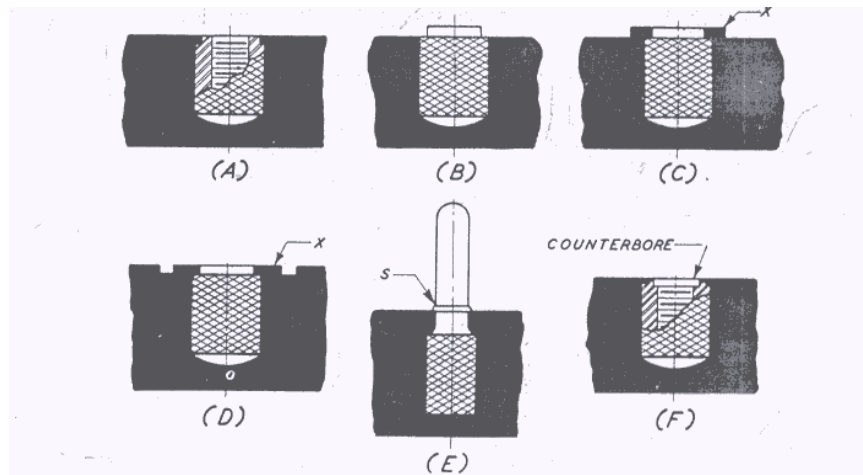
Several methods which prevent material from filling thread. Compound flows easily over end of insert (A) into threaded portion and insert must be retapped after molding. Insert shoulder enters mold pin (B) to prevent compound from flowing into insert. (This is the best construction.) Compound hardens quickly at thin sections "x" (C, D) stopping flow of compound over end of inserts and into thread. Squeeze ring "s" is crushed (E) when rod type insert is driven into mold insert pin thus sealing compound from exterior surface of insert. Internal counterbore (F) also prevents compound from entering thread. The mold pin fits the counterbore and inside diameter of the threaded section.
